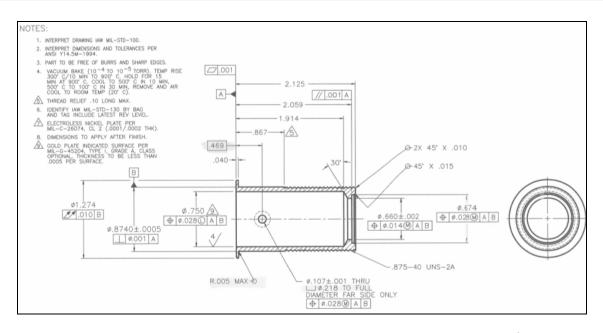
An example where GD&T is used in engineering drawing 3 .
